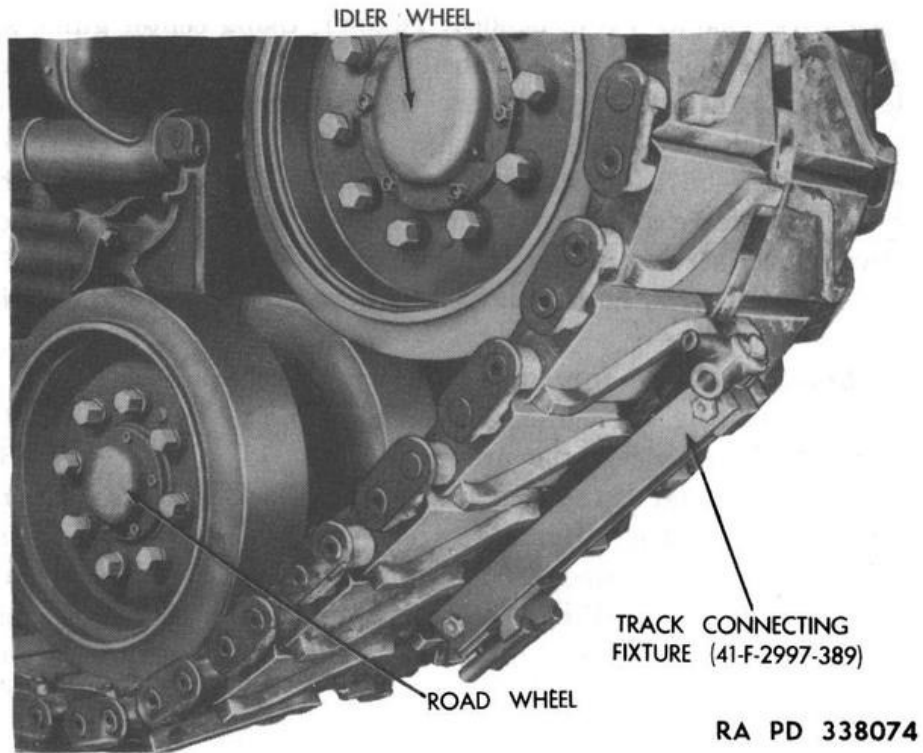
Track connecting fixture (41-F-2997-389)—installed.
